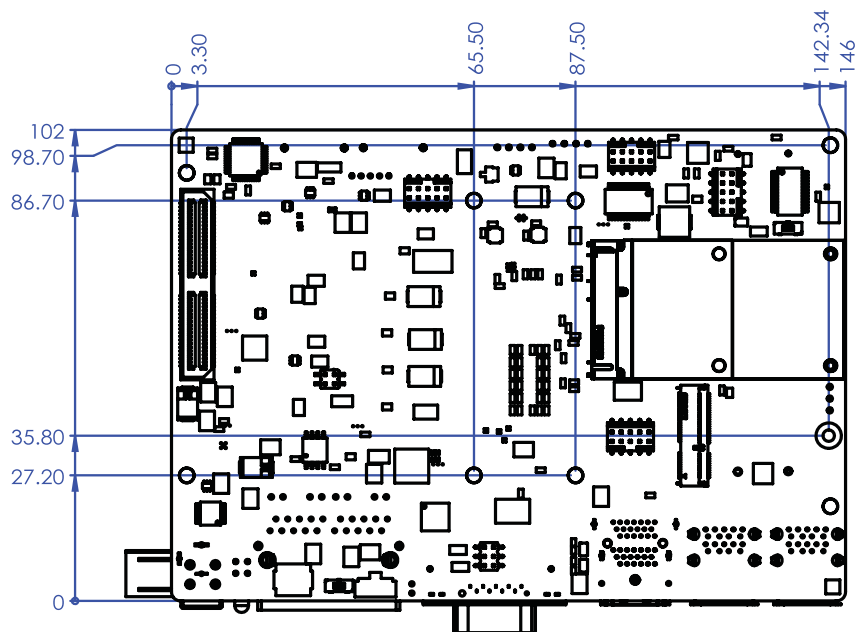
MIO-5391 Mechanical Drawing (Bottom Side)
